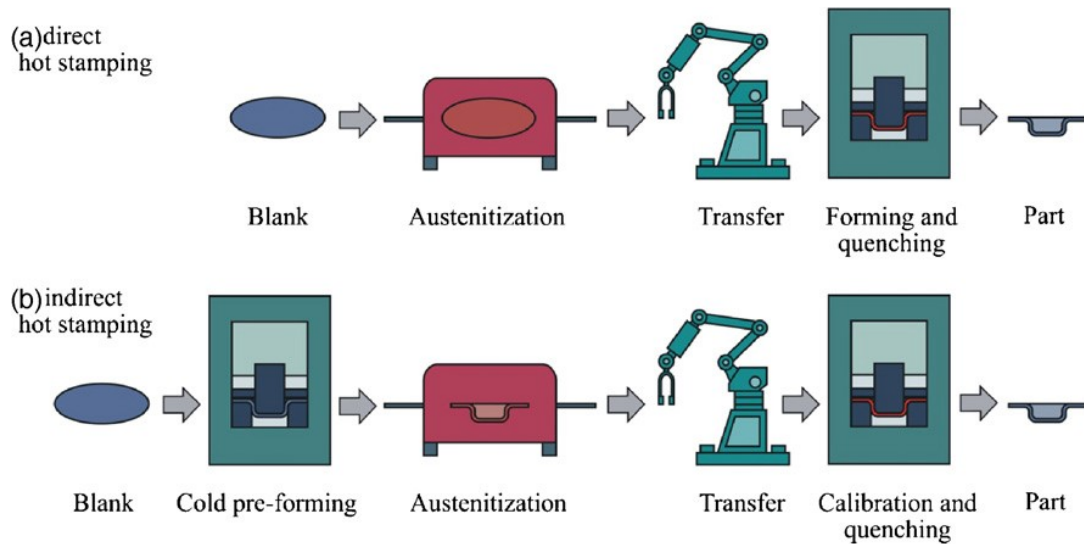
Schematic showing the (a) direct hot-stamping method which is the most common method used in the hot-stamping process and the more uncommon (b) indirect hot-stamping method [73].
